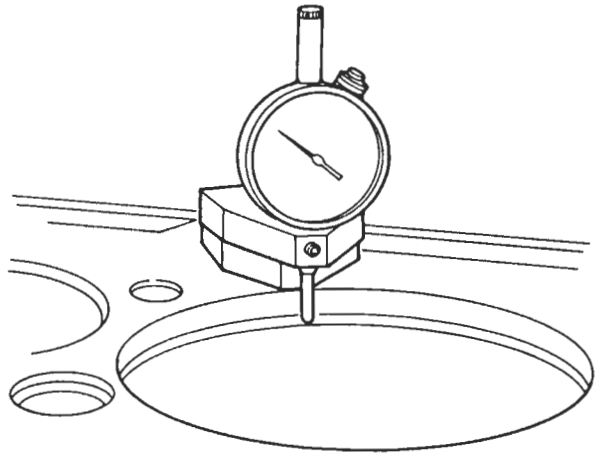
Checking Depth of Counterbore for Cylinder Liner with Tool J 22273–01
